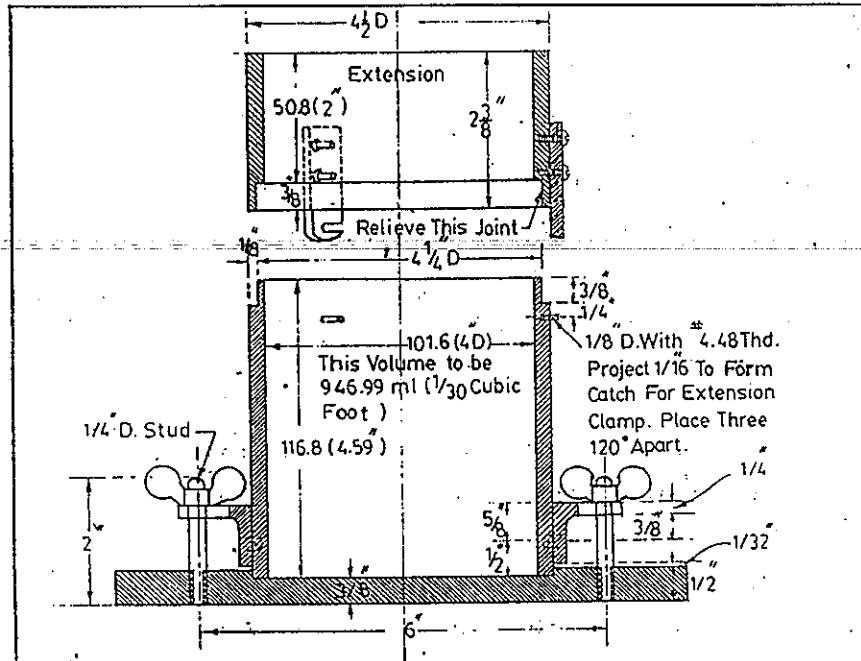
Cylindrical Mold, 101.6 mm (4.0 in.) For Soil Tests:
